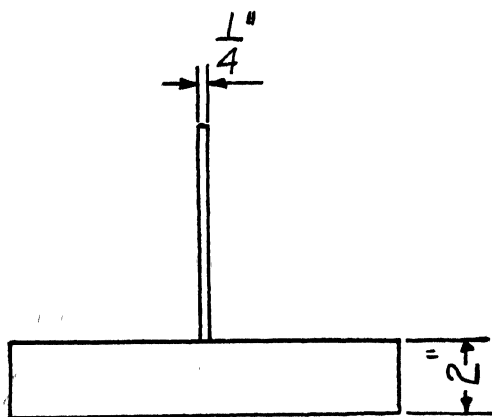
The plates to be welded — a thin web and a thick flange.
